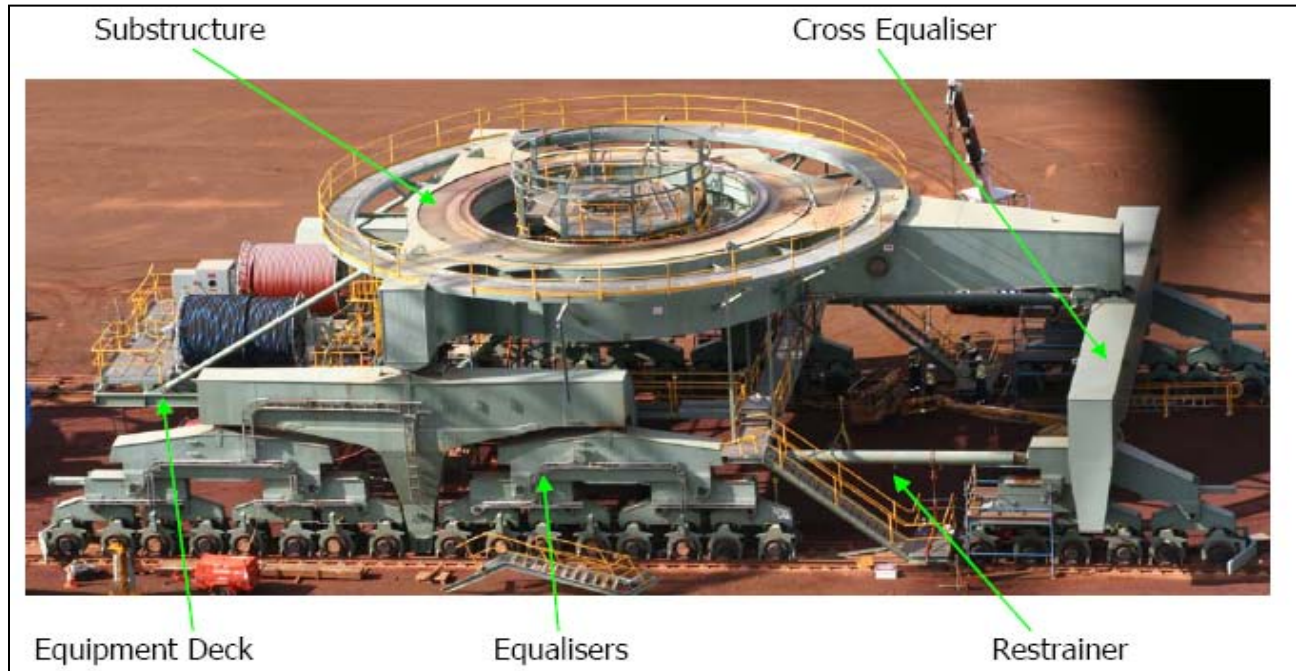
Bucket Wheel Reclaimer Undercarriage with Bogies, Wheels and Equalizers
